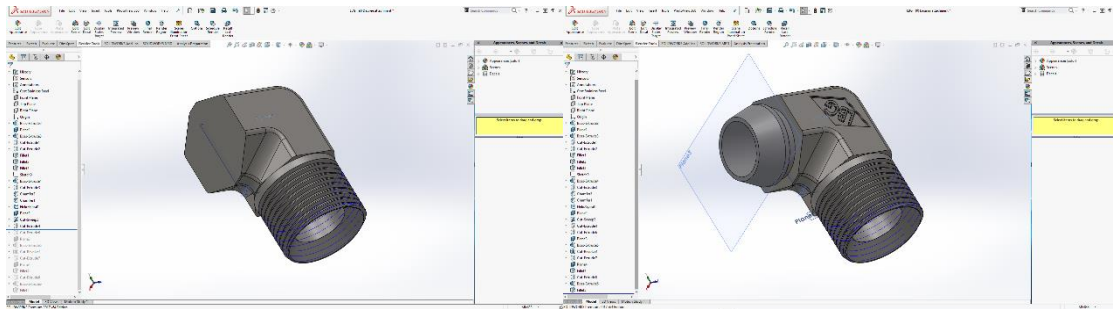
AC901616: CAD Drawing (Stages 3 & 4)
